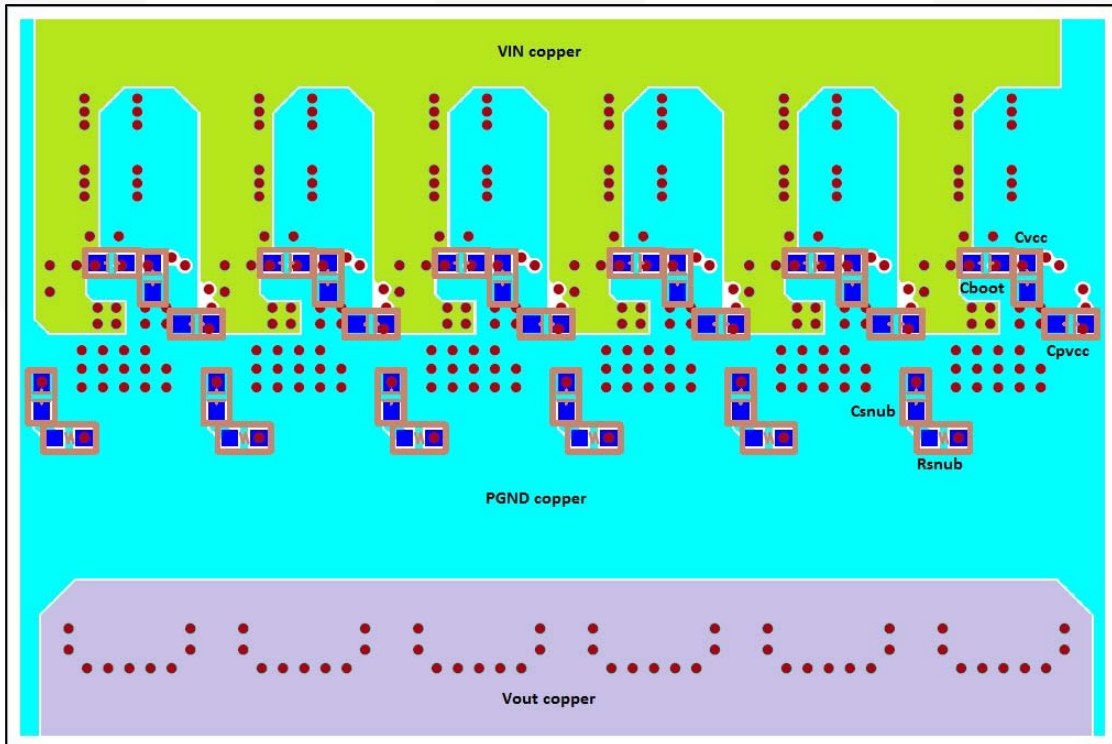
6-Phase Board Layout Example with 6 mm x 6 mm Inductor – Bottom View (Mirrored)
